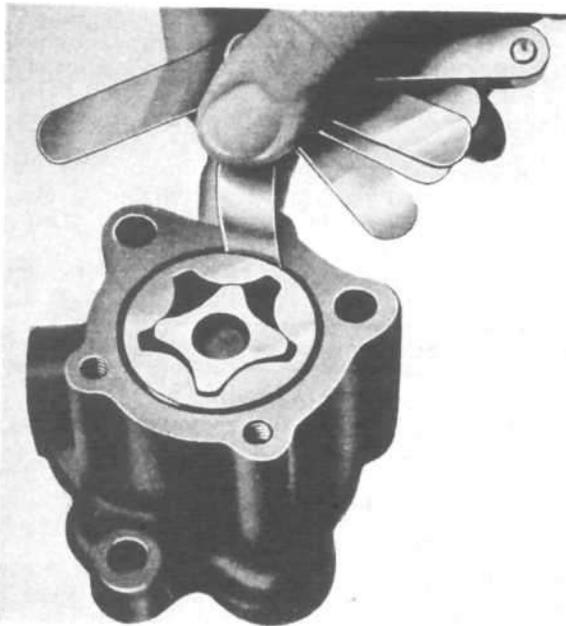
CHECKING OUTER ROTOR TO OIL PUMP BODY
